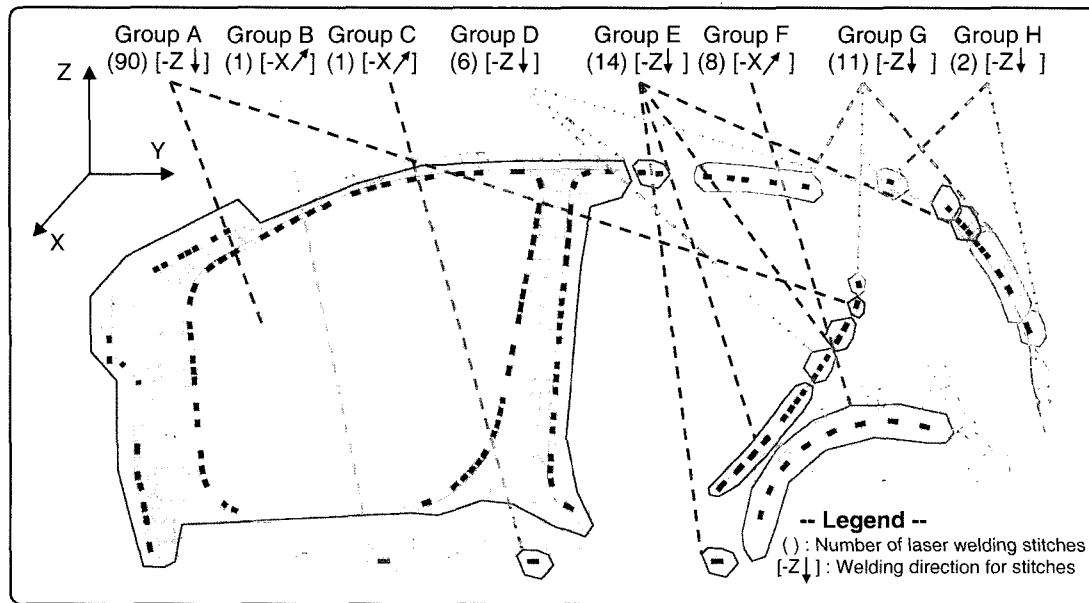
Grouping of laser welding stitches based on process parameters.
